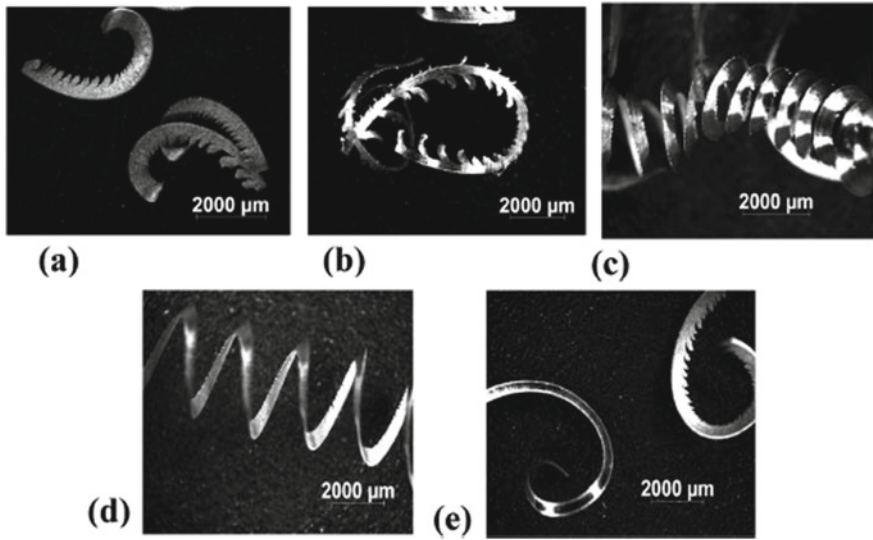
a MCD-coated tool b NCD-coated tool c BDD-coated tool d BMTN-coated tool e PCD tool [25]
